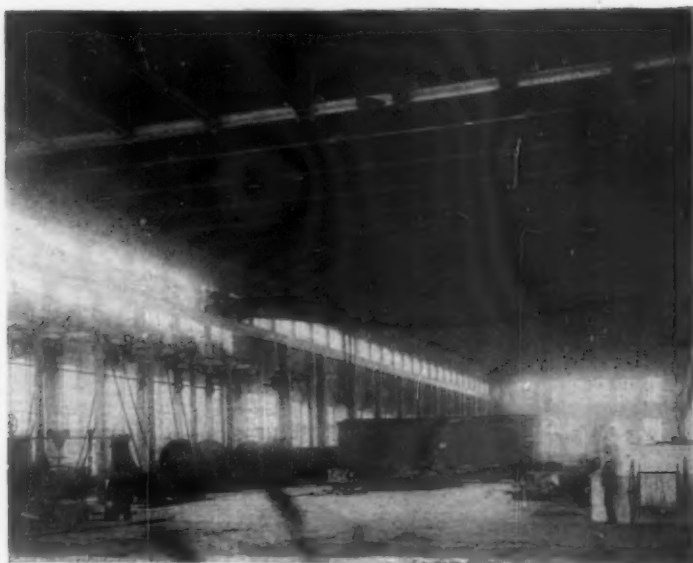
Forty-Ton Electric Crane and Wheel Lathes in Erecting Shop.
